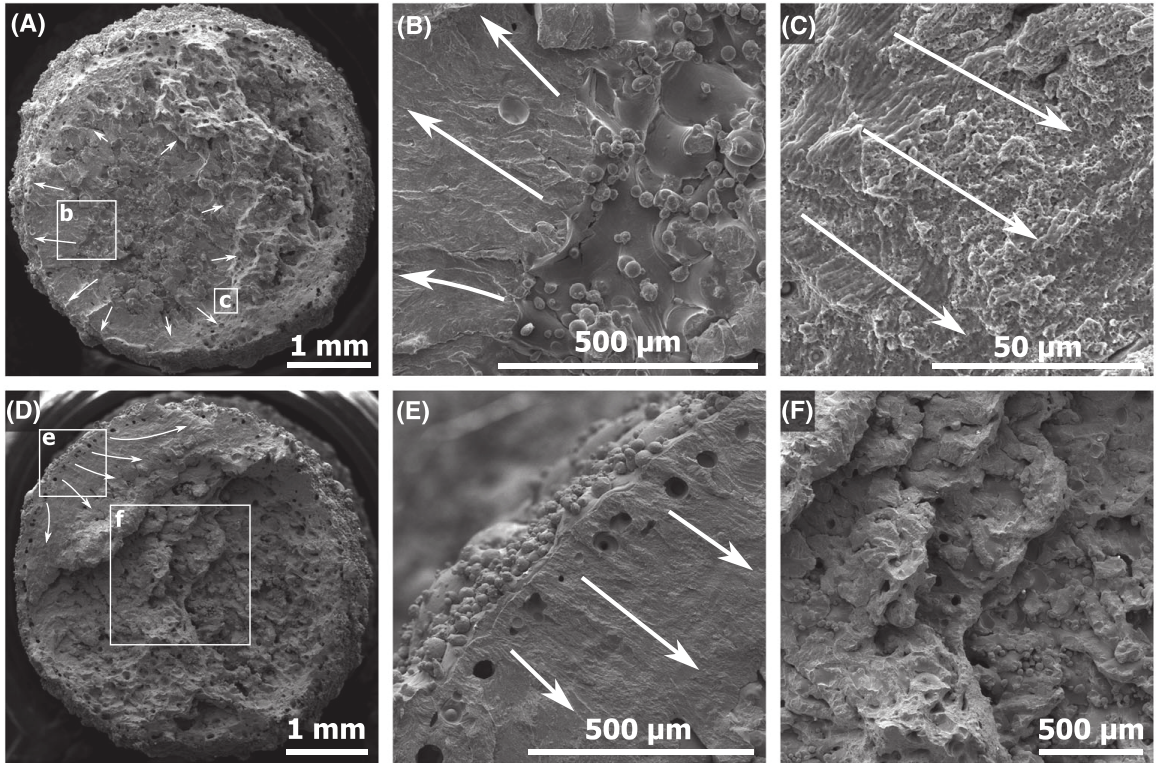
SEM of the two specimens: (a) whole fracture surface of specimen failing from internal defect; (b) detail from initiation; (c) Transition from striations to ductile failure; (d) whole fracture surface of specimen failing from surface defect; (e) detail of defect at fatigue initiation; (f) Detail from final rupture. The arrows are indicating the direction of crack propagation.
